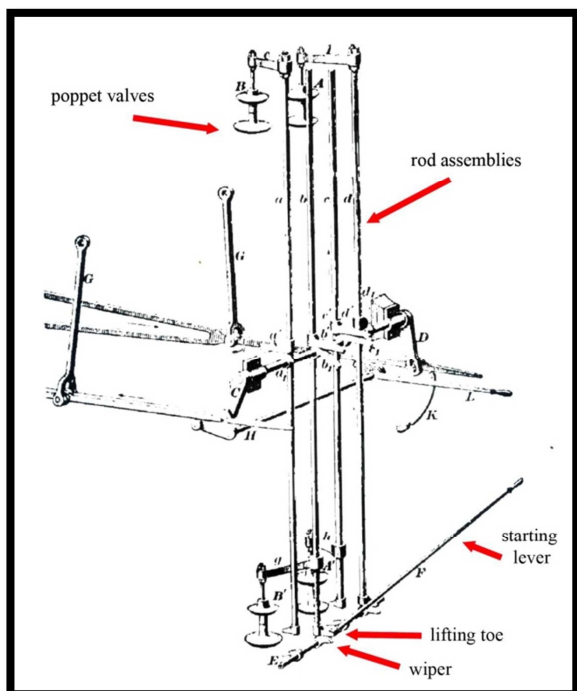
LIFTING ROD AND POPPET VALVE ASSEMBLIES. THE STEAM CHEST HAS BEEN OMITTED TO VIEW THE ASSEMBLIES; MODIFIED FROM INTERNATIONAL CORRESPONDENCE SCHOOLS (1897:69, FIG. 331)
